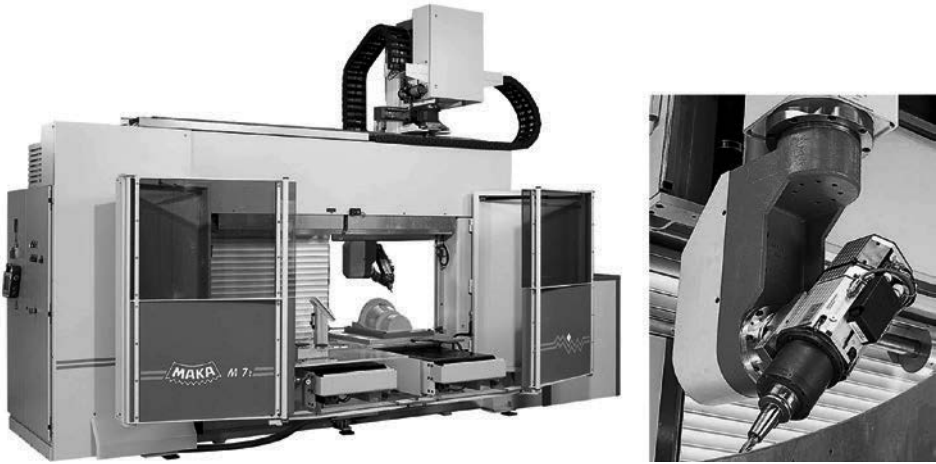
Left: 5-axis milling machine (illustration provided by MAKKA)
